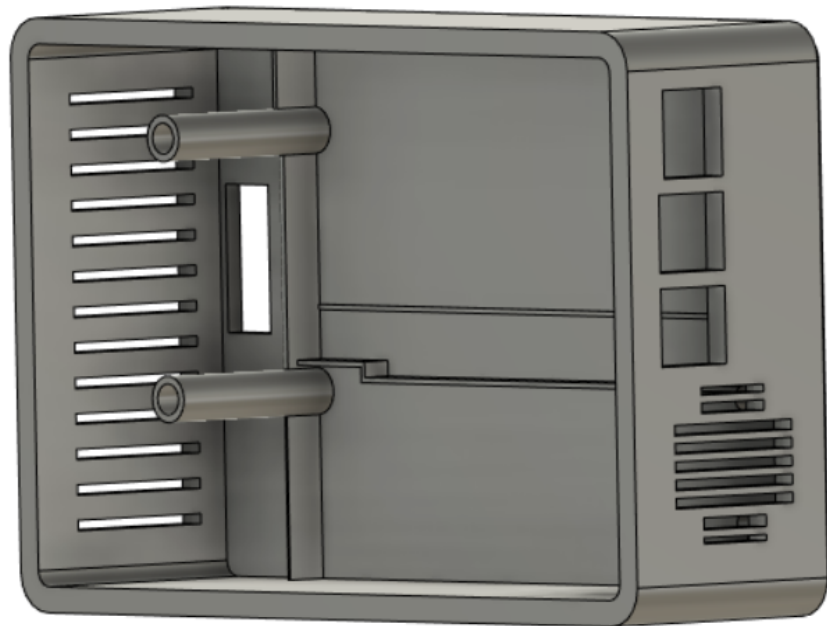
Enclosure CAD drawing, body, perspective projection.
